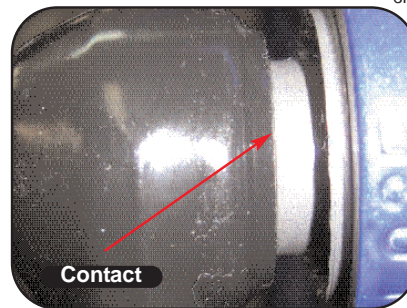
When correctly installed the crankarm stop-surface contacts the bottom bracket crank-stop.
